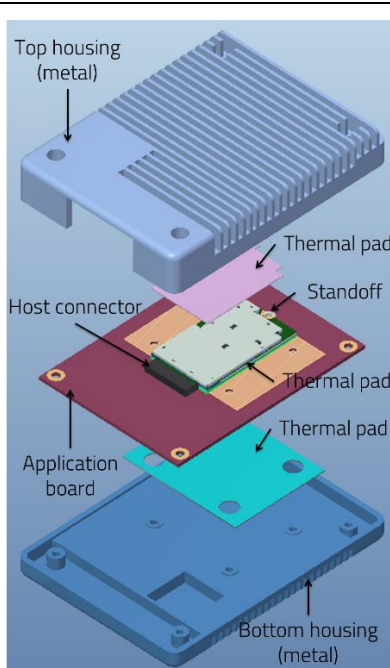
Metal housing on both top and bottom, thermal pad between PCB and application board (Simulation [Figure 9-24](#))
